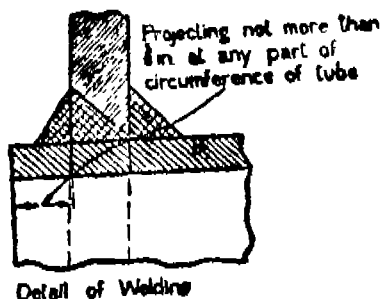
Fusion Welding of Cross Tubes of Vertical Cross Tube Boilers.
